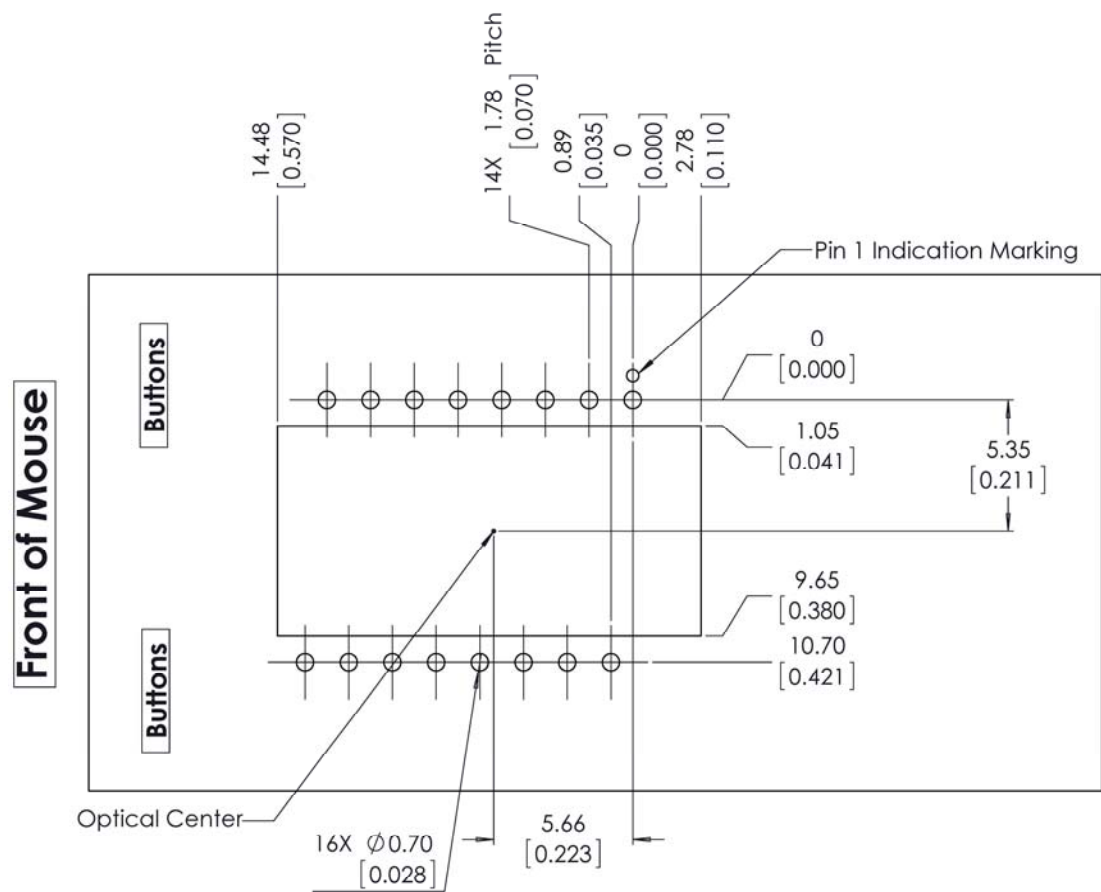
Recommended sensor orientation, mechanical cutouts and spacing (Top View)
